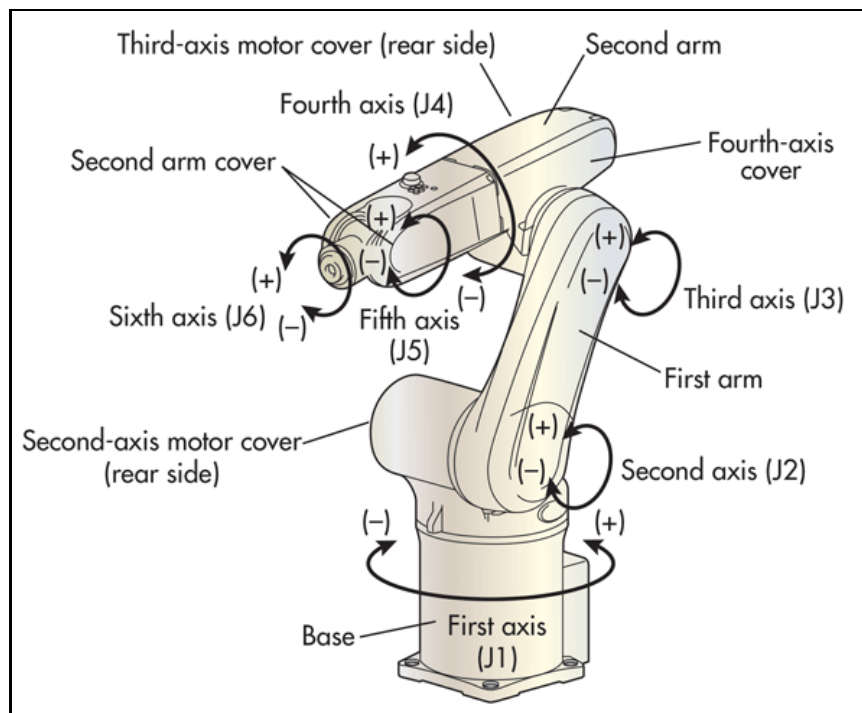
Industrial cylindrical arm robot with six axes [Machine Design, 2020]
